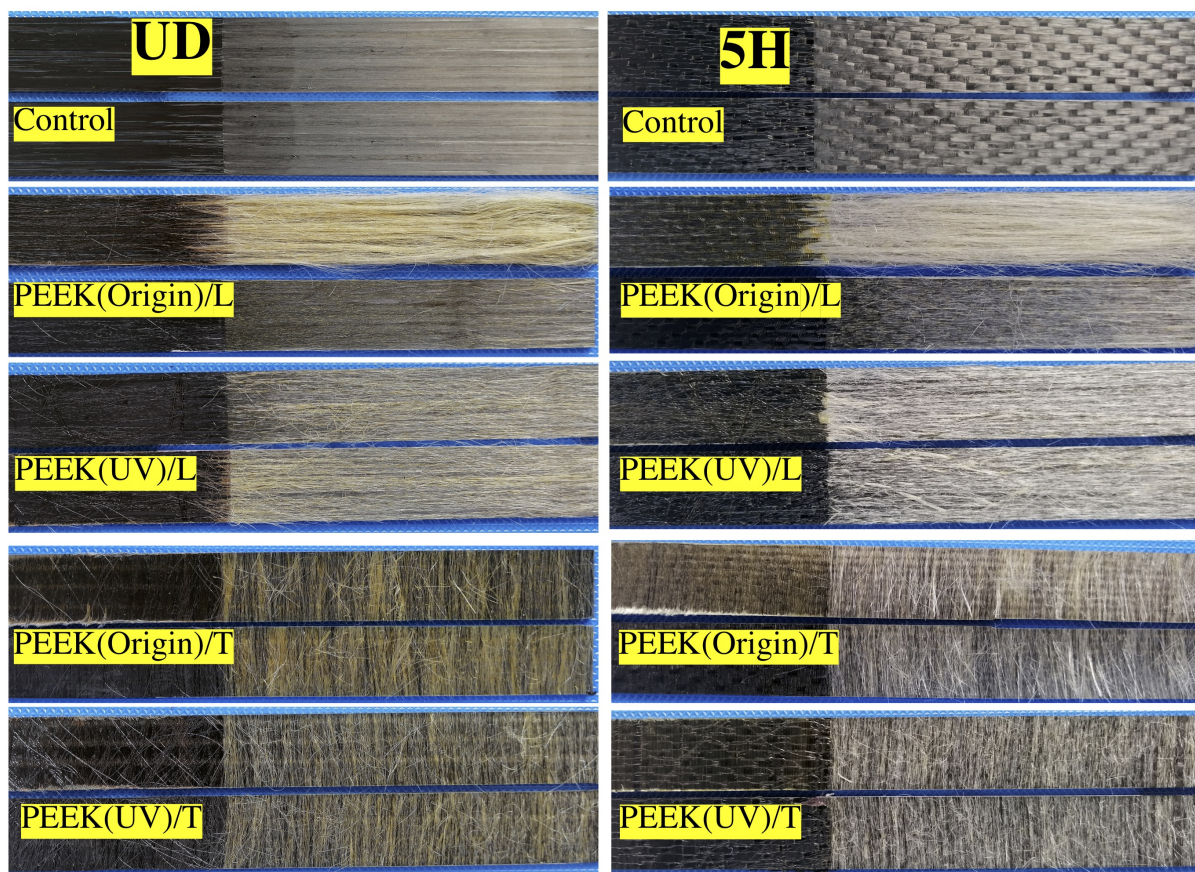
Typical photographs of the fracture surfaces of different laminates. The upper and lower fracture surfaces are from the same specimens in each case.
